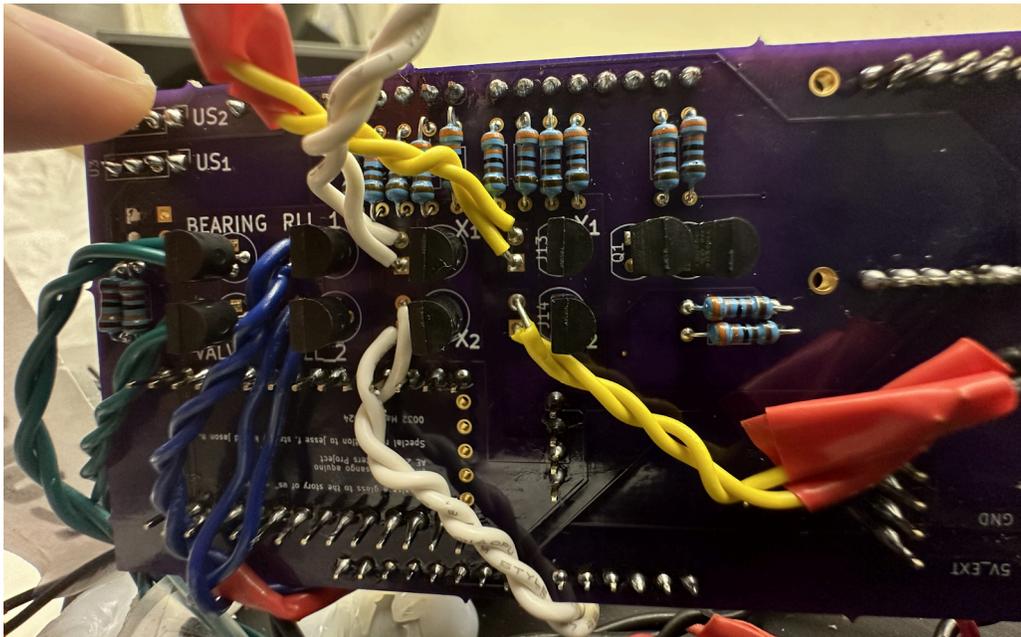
Additional picture of solenoid wires connected to the PCB board
